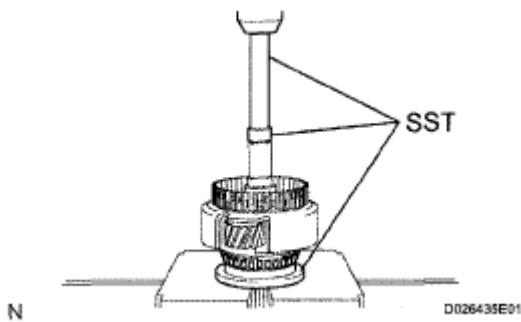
Pressing Radial Ball Bearing Rear In Underdrive Planetary Gear
